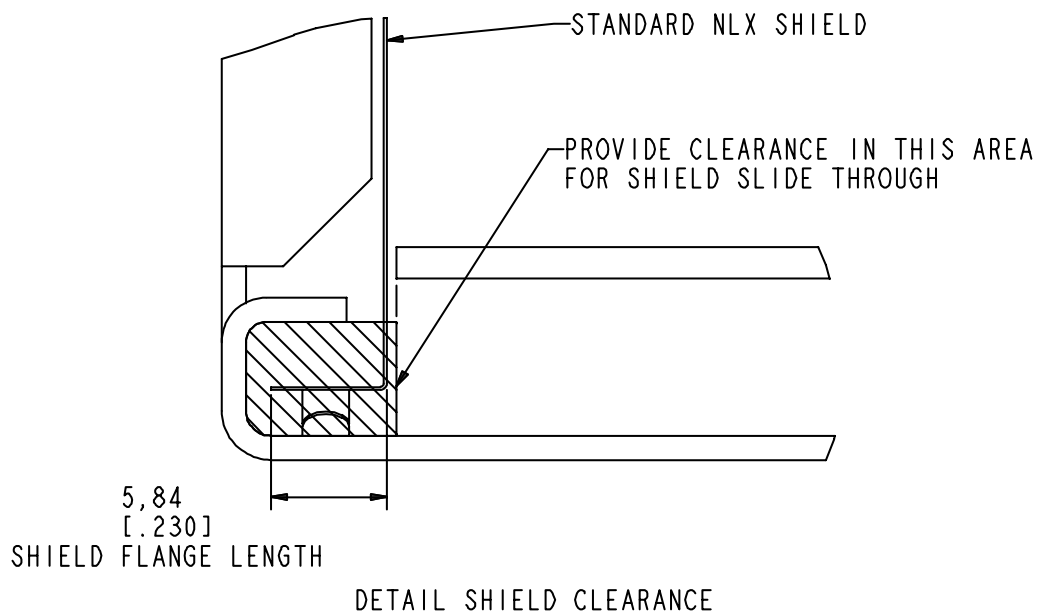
Side View of Back Panel Double High I/O Shield Opening Dimensions
